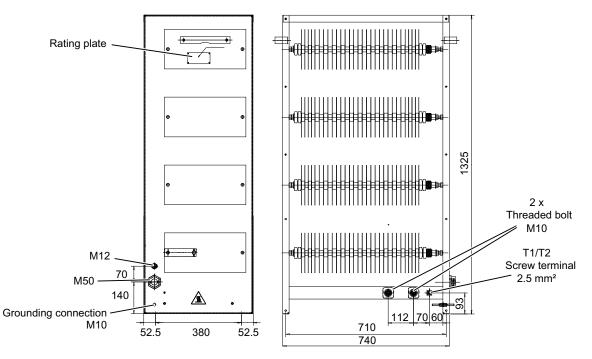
Dimension drawing for braking resistor 50 kW, 250 kW (option L62 / L65)
